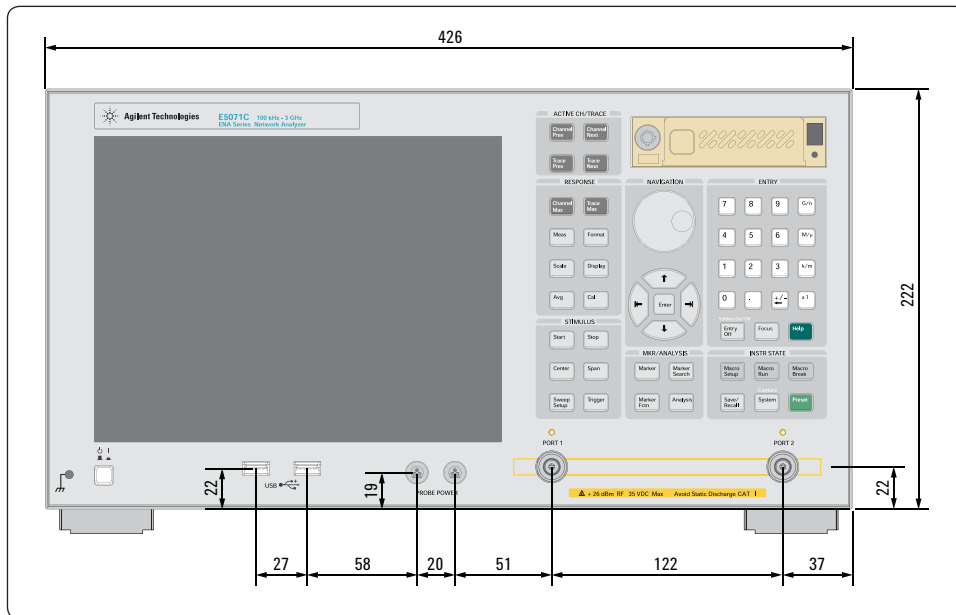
Dimensions (front view, E5071C with Option 230/235/240/245/260/265/280/285, in millimeters)
